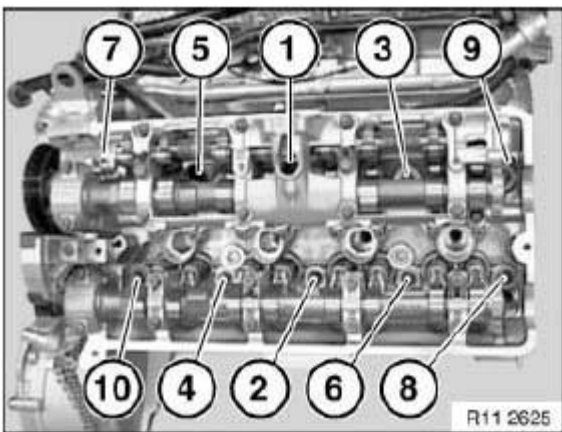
Releasing Cylinder-Head Bolts In Reverse Order
